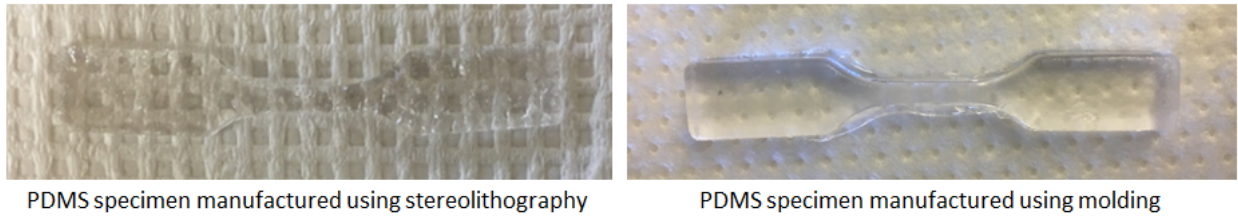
Stereolithography 3D printed PDMS specimen and molded PDMS specimen
